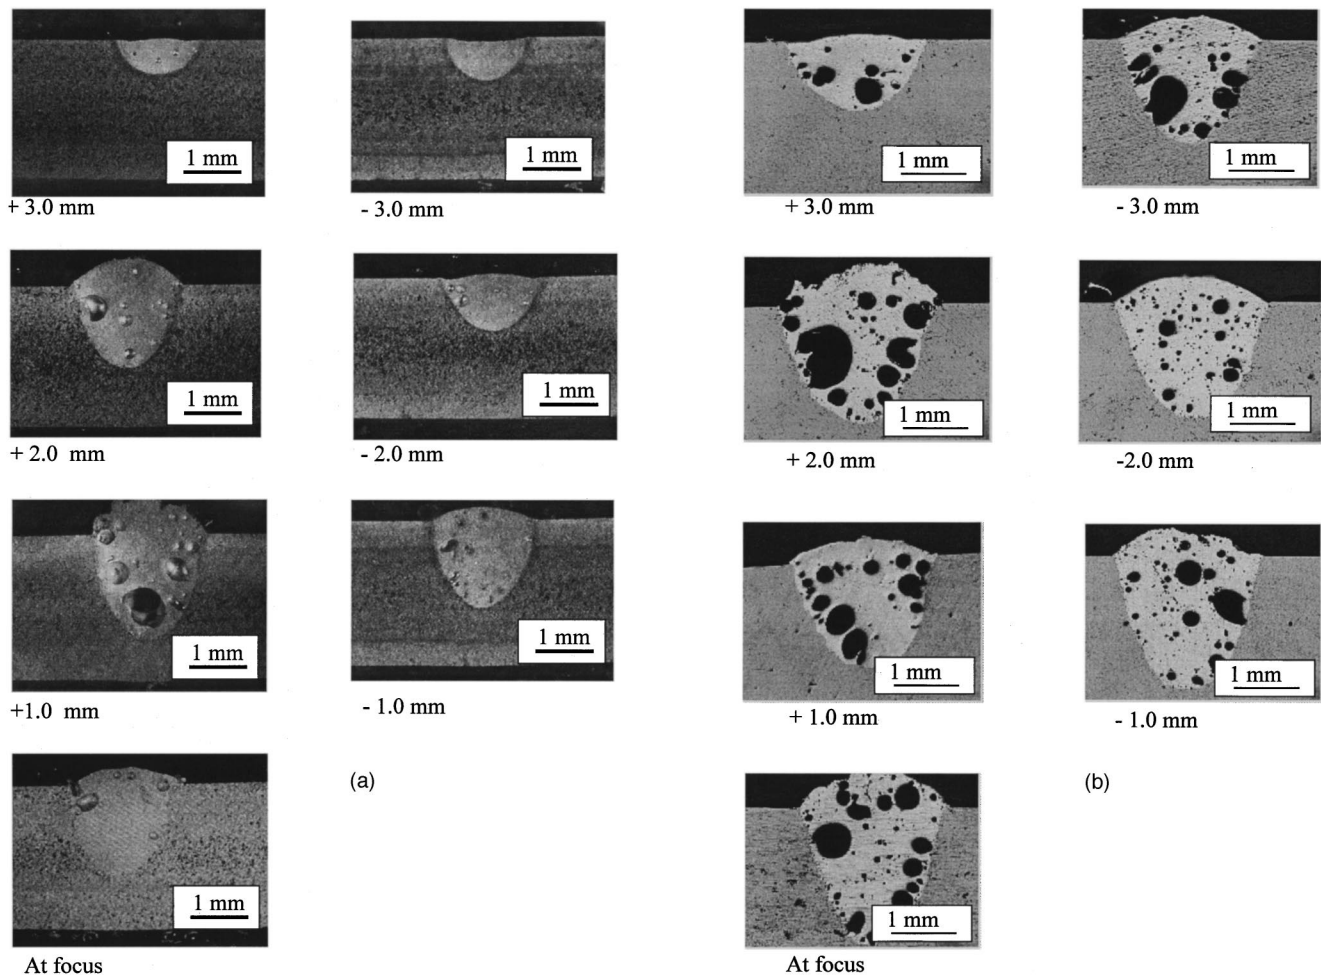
Cross sections of laser welds produced at several beam defocus values.
